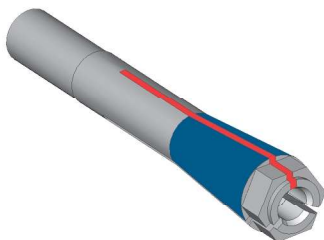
GREASING THE COLLET CHUCK; SURFACE IN WHICH GREASE IS TO BE APPLIED IS MARKED IN BLUE; SLOT THAT MAY NOT BE GREASED IS MARKED IN RED
